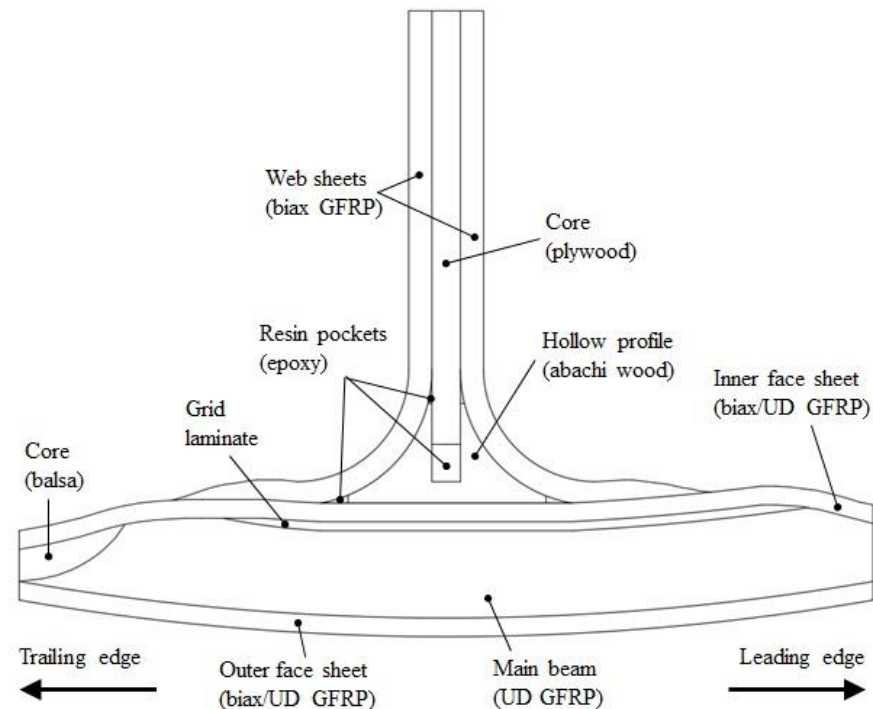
Tip side of the T-joint demonstrator, schematic of materials [150]
